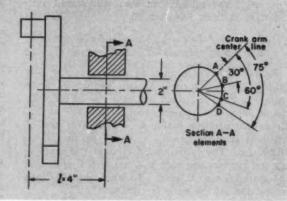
Crank and crankshaft element of Scotch - yoke mechanism in Fig. 8
